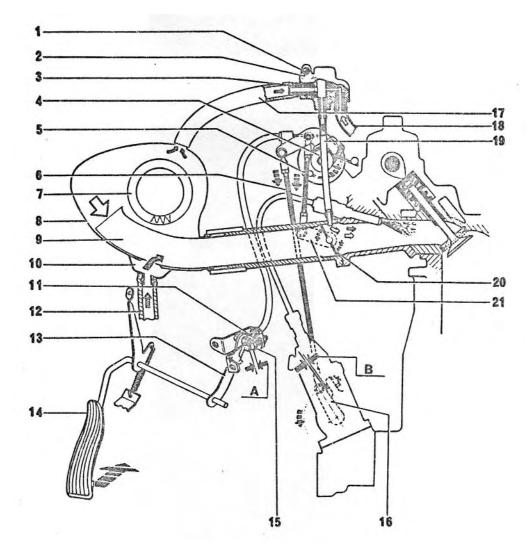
THROTTLE-CONTROL UNIT LINKAGE ADJUSTMENT
